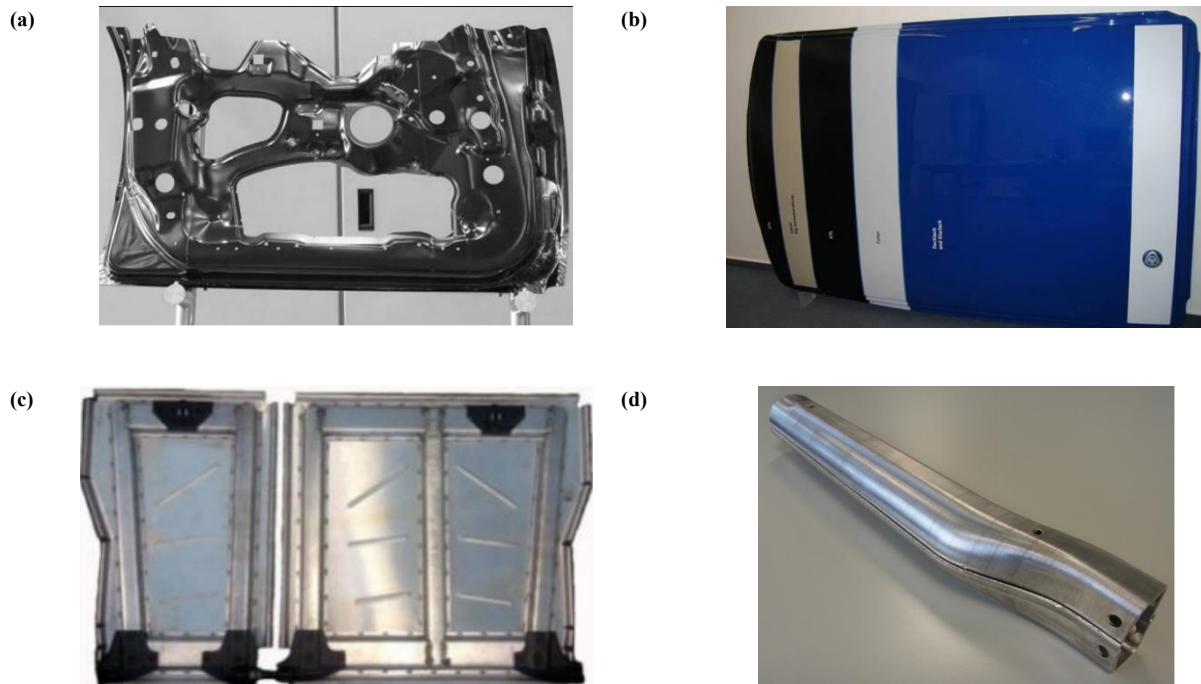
Prototypes of car tools successfully produced from AZ31: (a) shows door inner reinforcement produced (FhG, IWU Chemnitz), (b) car roof (MgF Magnesium Flachprodukte GmbH), (c) automobile rear panel (BMW) and (d) part of crossmember (AWEBA Werkzeugbau GmbH and Karosseriewerke Dresden GmbH) [2].
